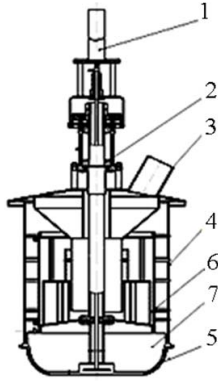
Scheme of the rotating vibrating granulator: 1 – vibrating device; 2 – bearing attachment unit; 3 – float inlet; 4 – body; 5 – perforated bottom (basket); 6 – float distributor in the basket; 7 – shoulder blades
